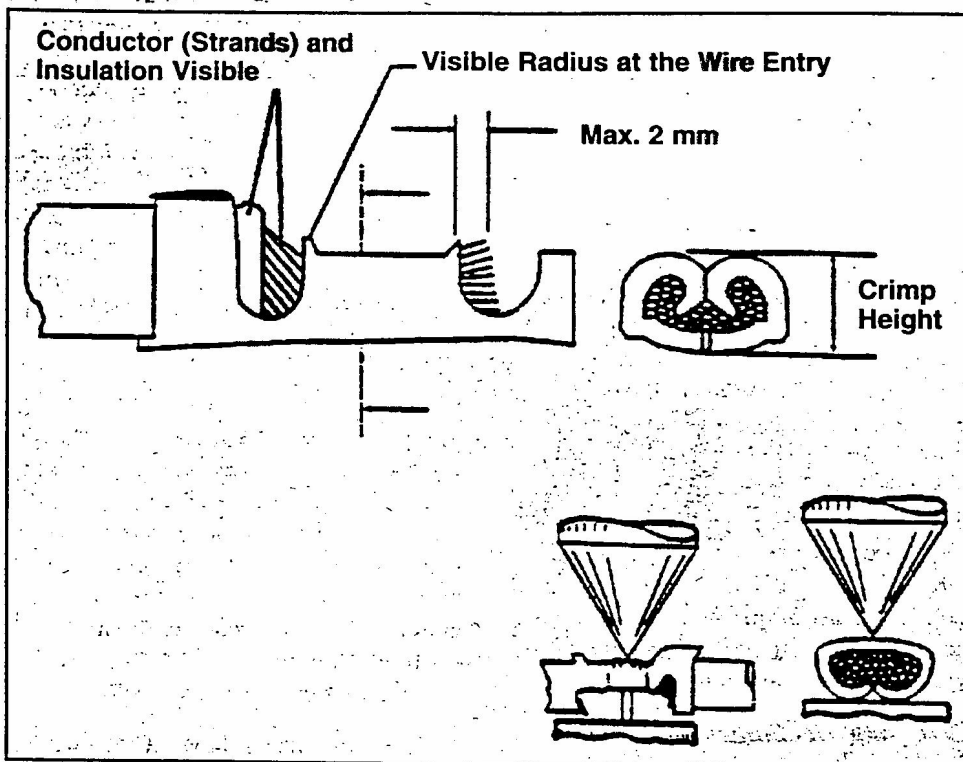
Example of crimp inspection criteria, the crimp height and a crimp height measurement method are also shown.
